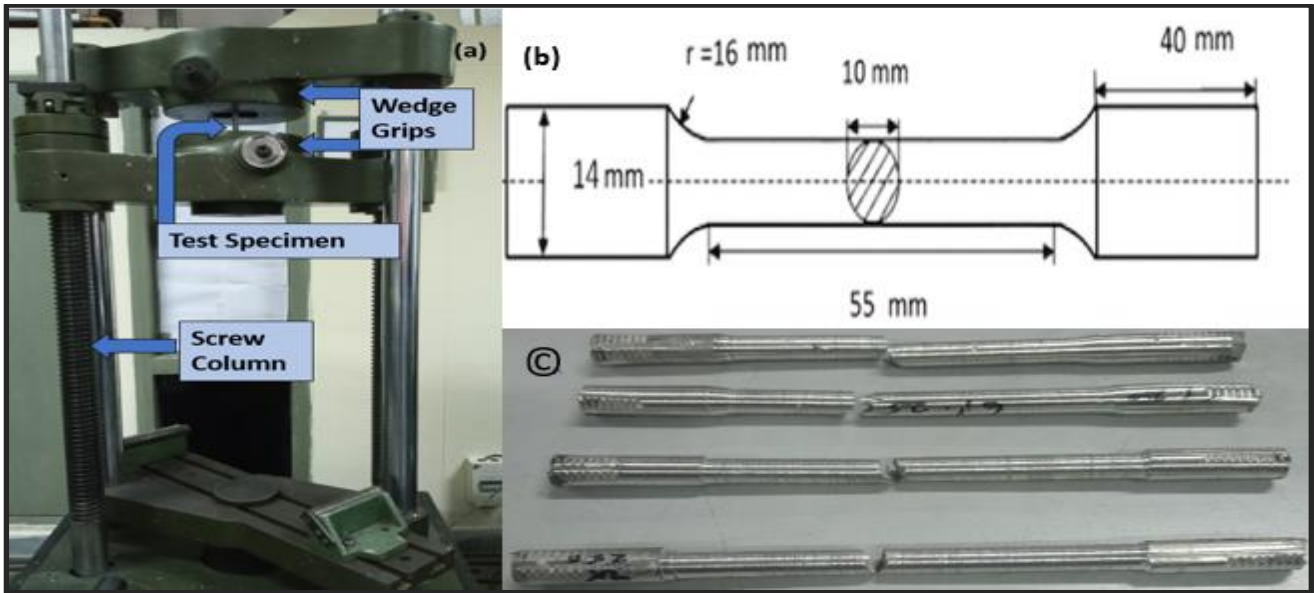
(a) Setup of UTM (b) Standard dimension used in tensile testing (c) Samples after testing
